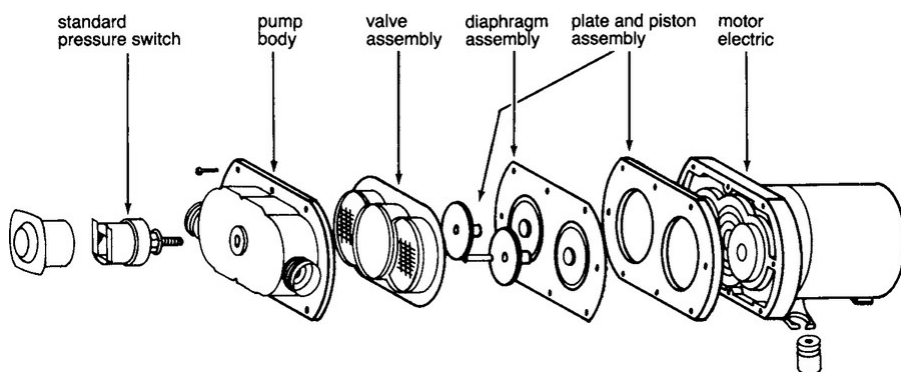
A. Exploded views of typical PAR diaphragm pumps—belt
